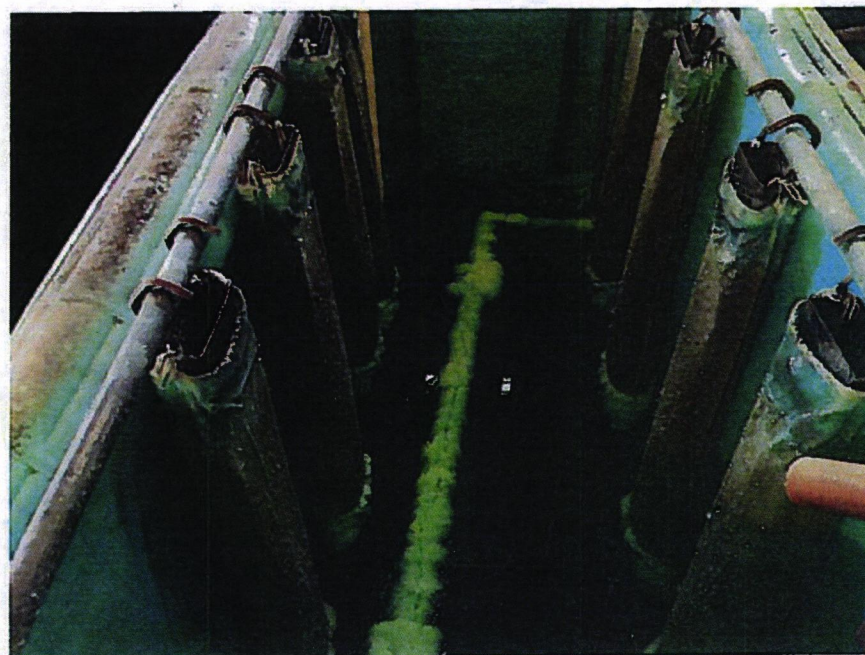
09/06/2016. Main plating line tank with lead anodes hanging from steel piping on the sides of the tank. Liquids remaining in the bottom of the tank.
